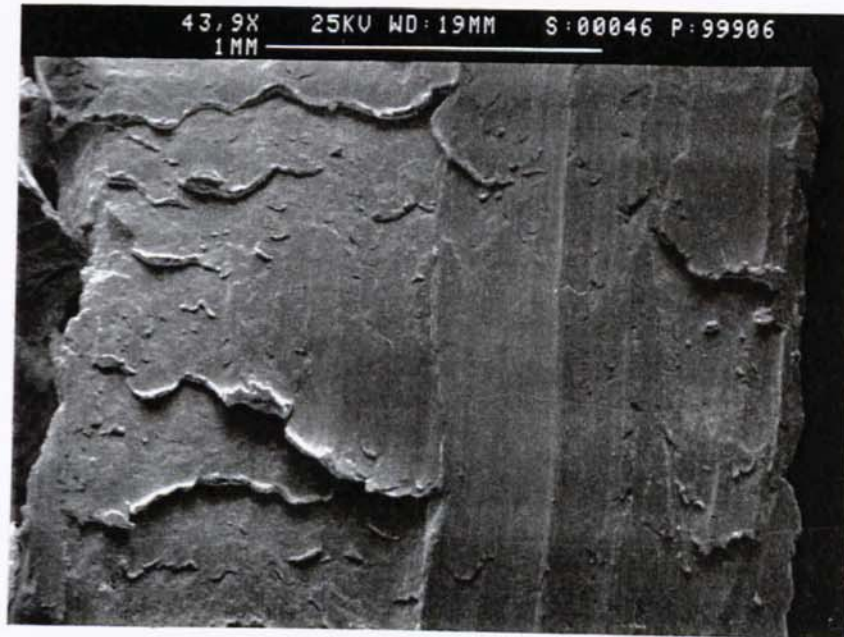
shows the surface of the chip under a magnification of 47.8X. The cutting speed to machine the M2 HSS was 10 m/min. It is seen here that a coarse surface on the chip is produced.
